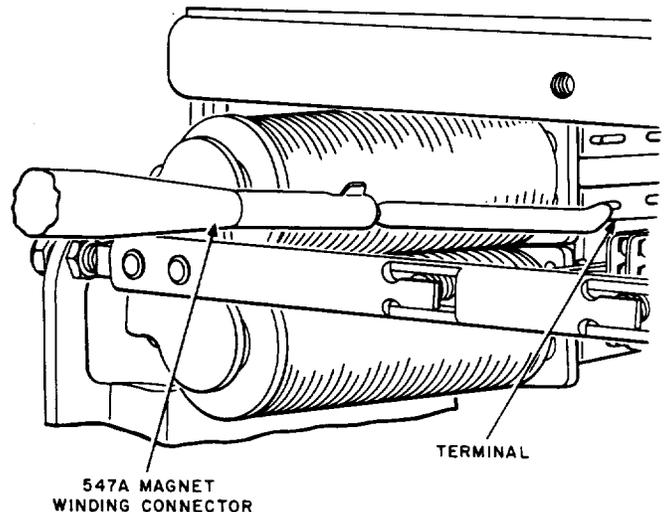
Connecting to Winding Terminal of the Select Magnet of a 300- or Similar-Type Switch
